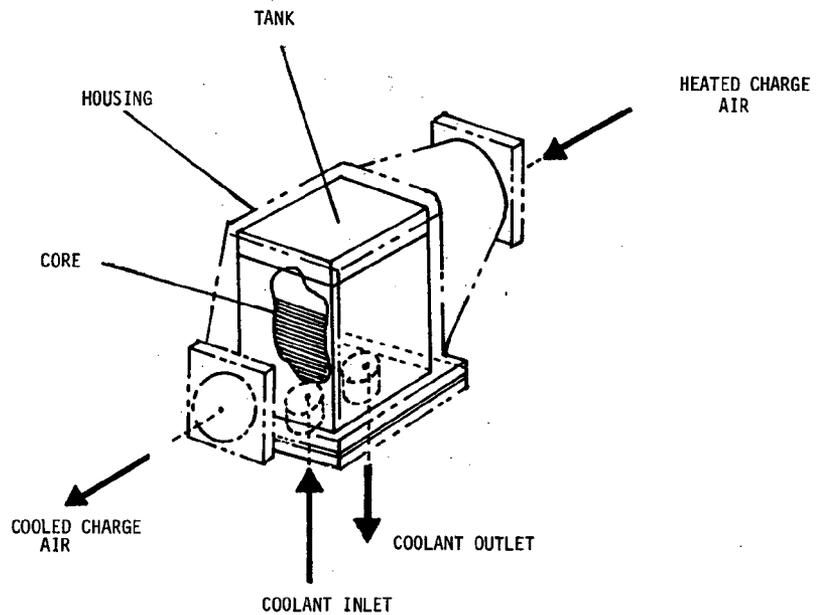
AIR TO COOLANT—MOUNTED REMOTELY
